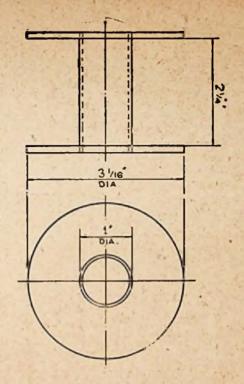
Former details for 5 millihenry, 3 amp., choke.
